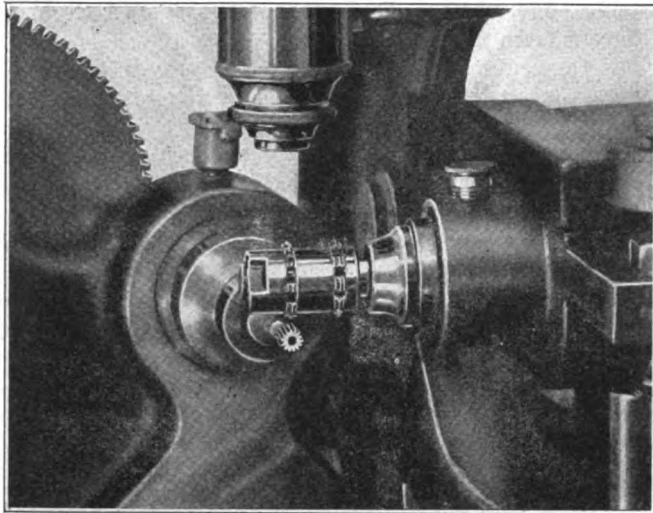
LATE TYPE OF PINION CUTTING MACHINE
